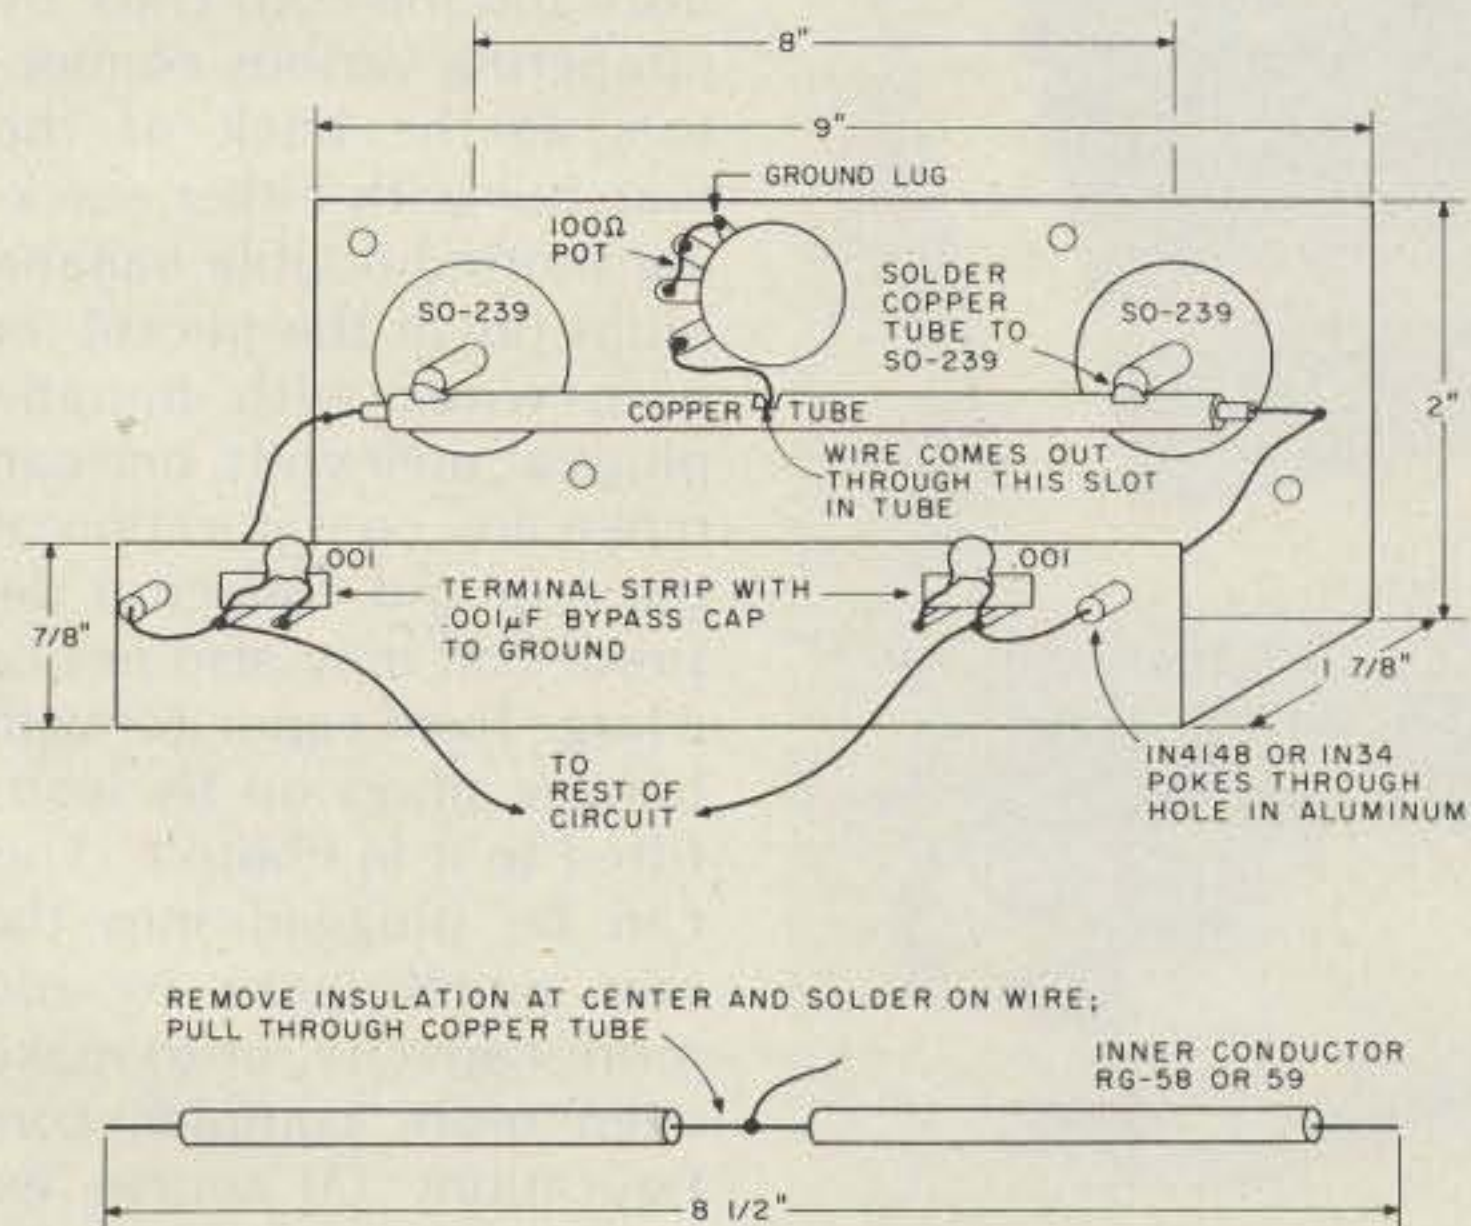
Sheet metal layout and pickup element plans for the Varimatcher swr bridge.
